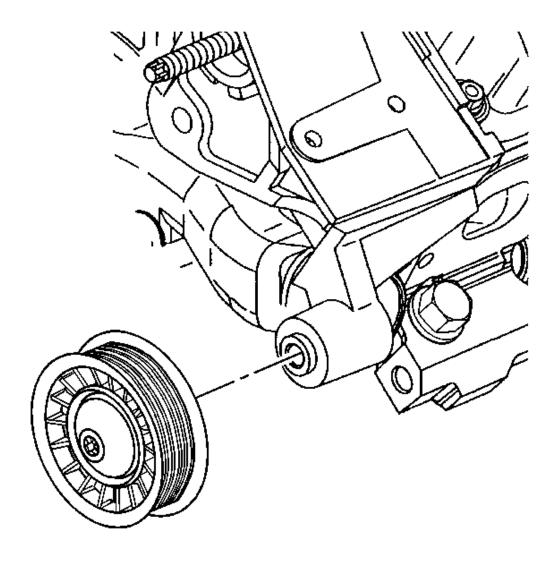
Removing/Installing Upper Drive Belt Idler Pulley Courtesy of GENERAL MOTORS CORP.
